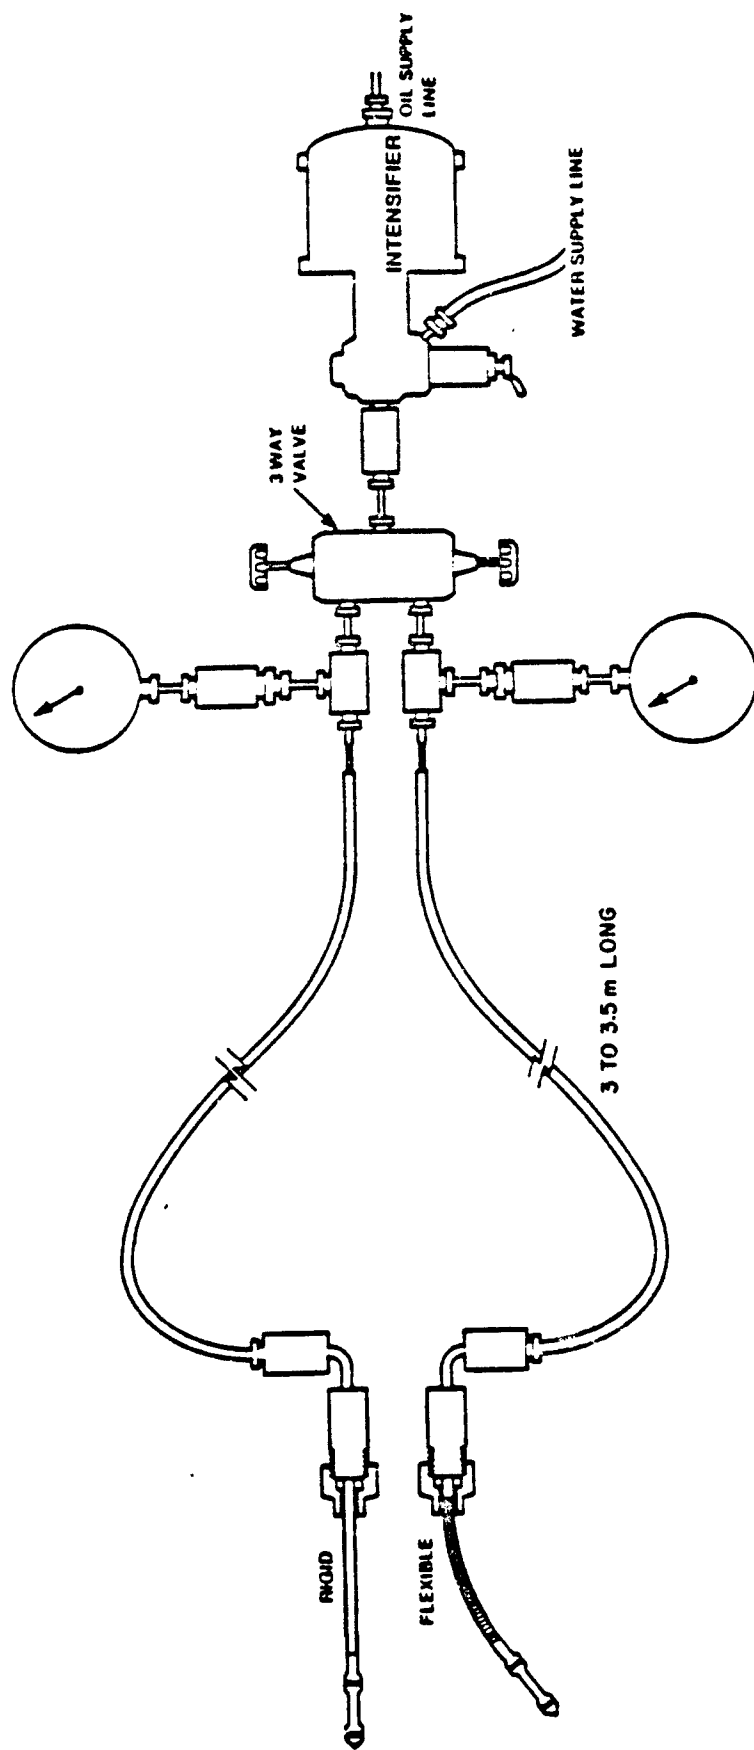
SCHEMATIC DIAGRAM OF HYDRAULIC EXPANSION EQUIPMENT
